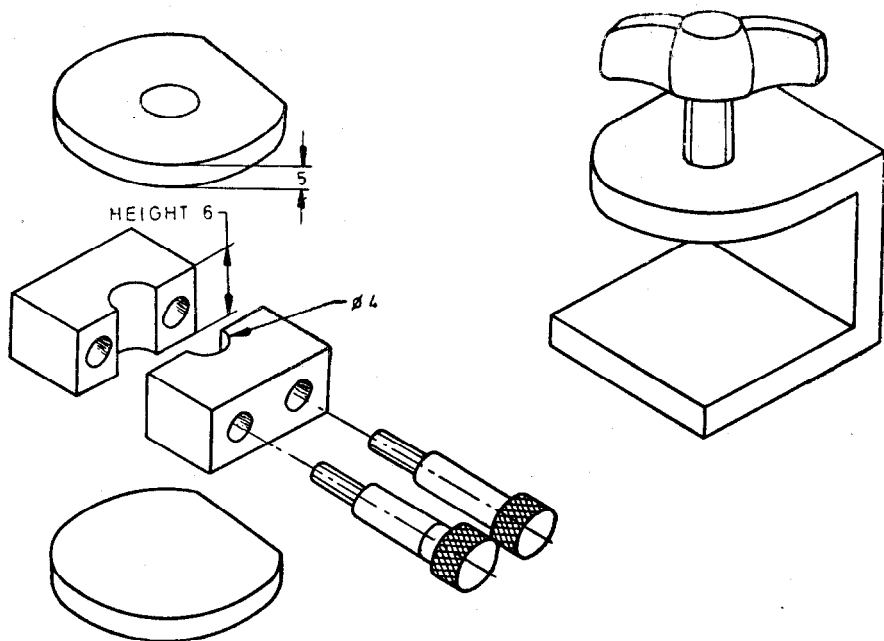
MOULD AND CLAMP FOR PREPARATION OF COMPRESSION TEST SPECIMEN
